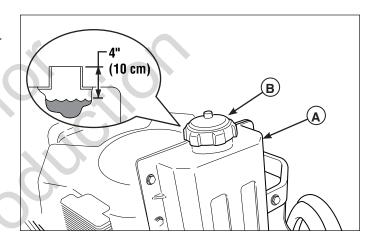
Checking Hydraulic Oil Level A. Hydraulic Oil Reservoir B. Reservoir Cap
